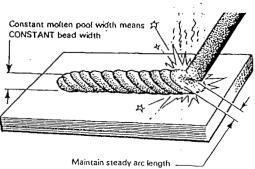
MANUAL METAL ARC WELDING.
